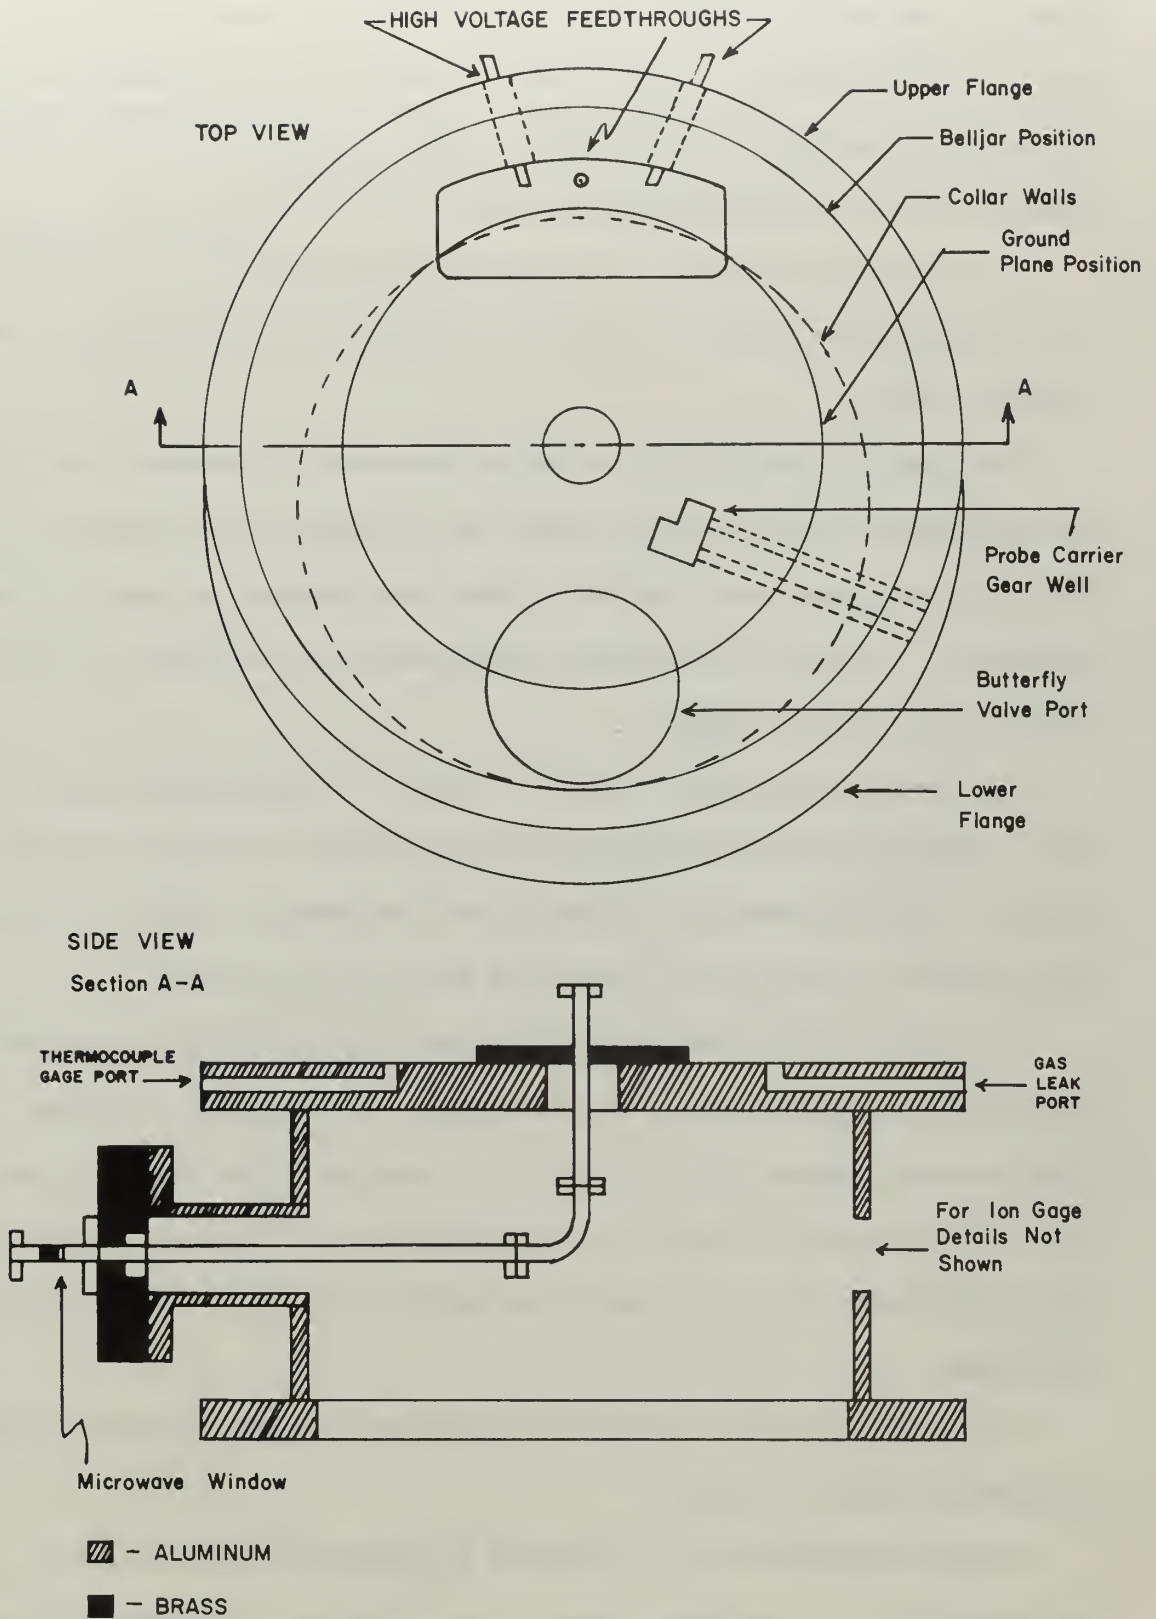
FEED THROUGH COLLAR ASSEMBLY
